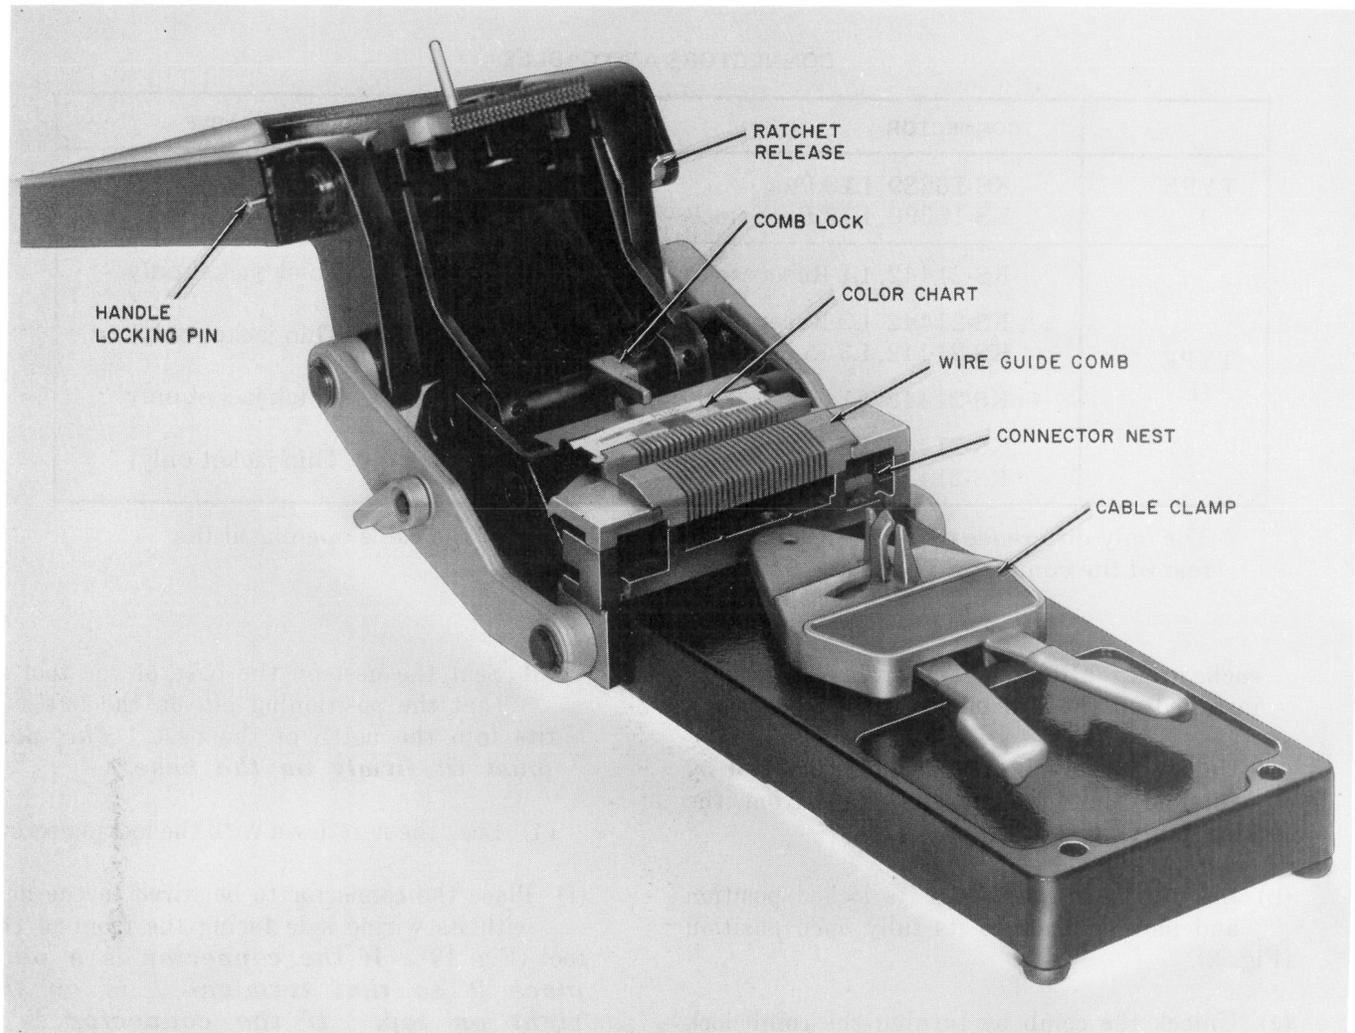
KS-21749 Connecting Tool, Front View With Handle Open
